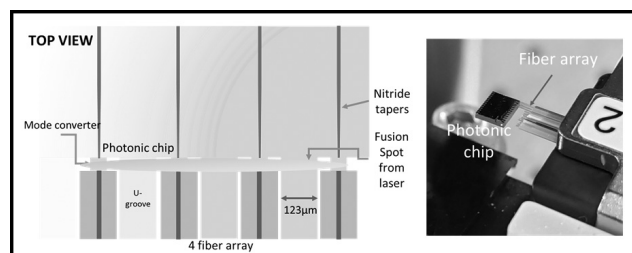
Left; Schematic representation of the top view of the method shows the fusion splicing spot from the CO₂ laser and the u-grooves for aligning fiber arrays. Right; A photograph of a packaged photonic device to a fiber array on a holder.
